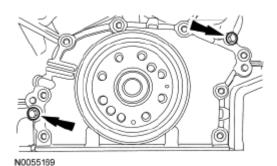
Locating M6 Oil Pan Bolts Courtesy of FORD MOTOR CO.
